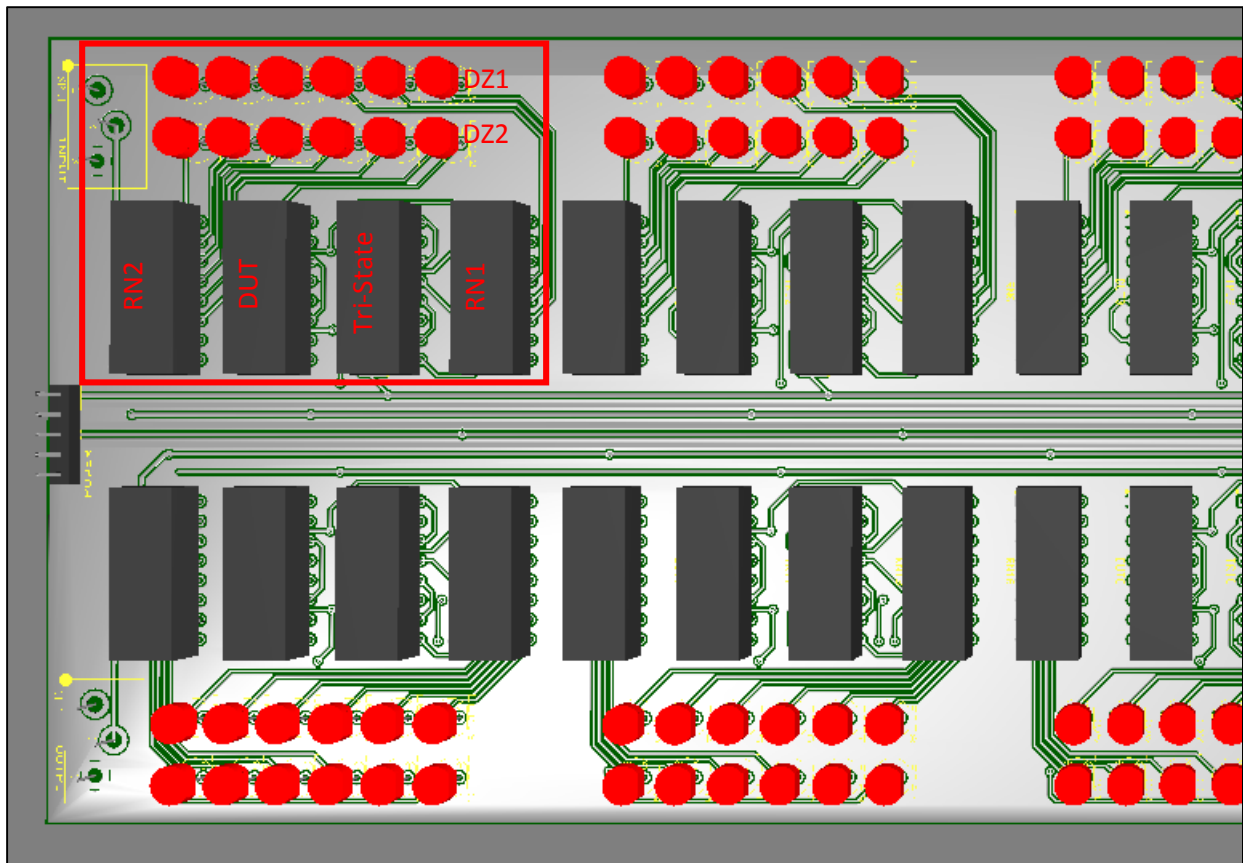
3D Preview of the Burn-in PCB – one testing cluster is outlined
